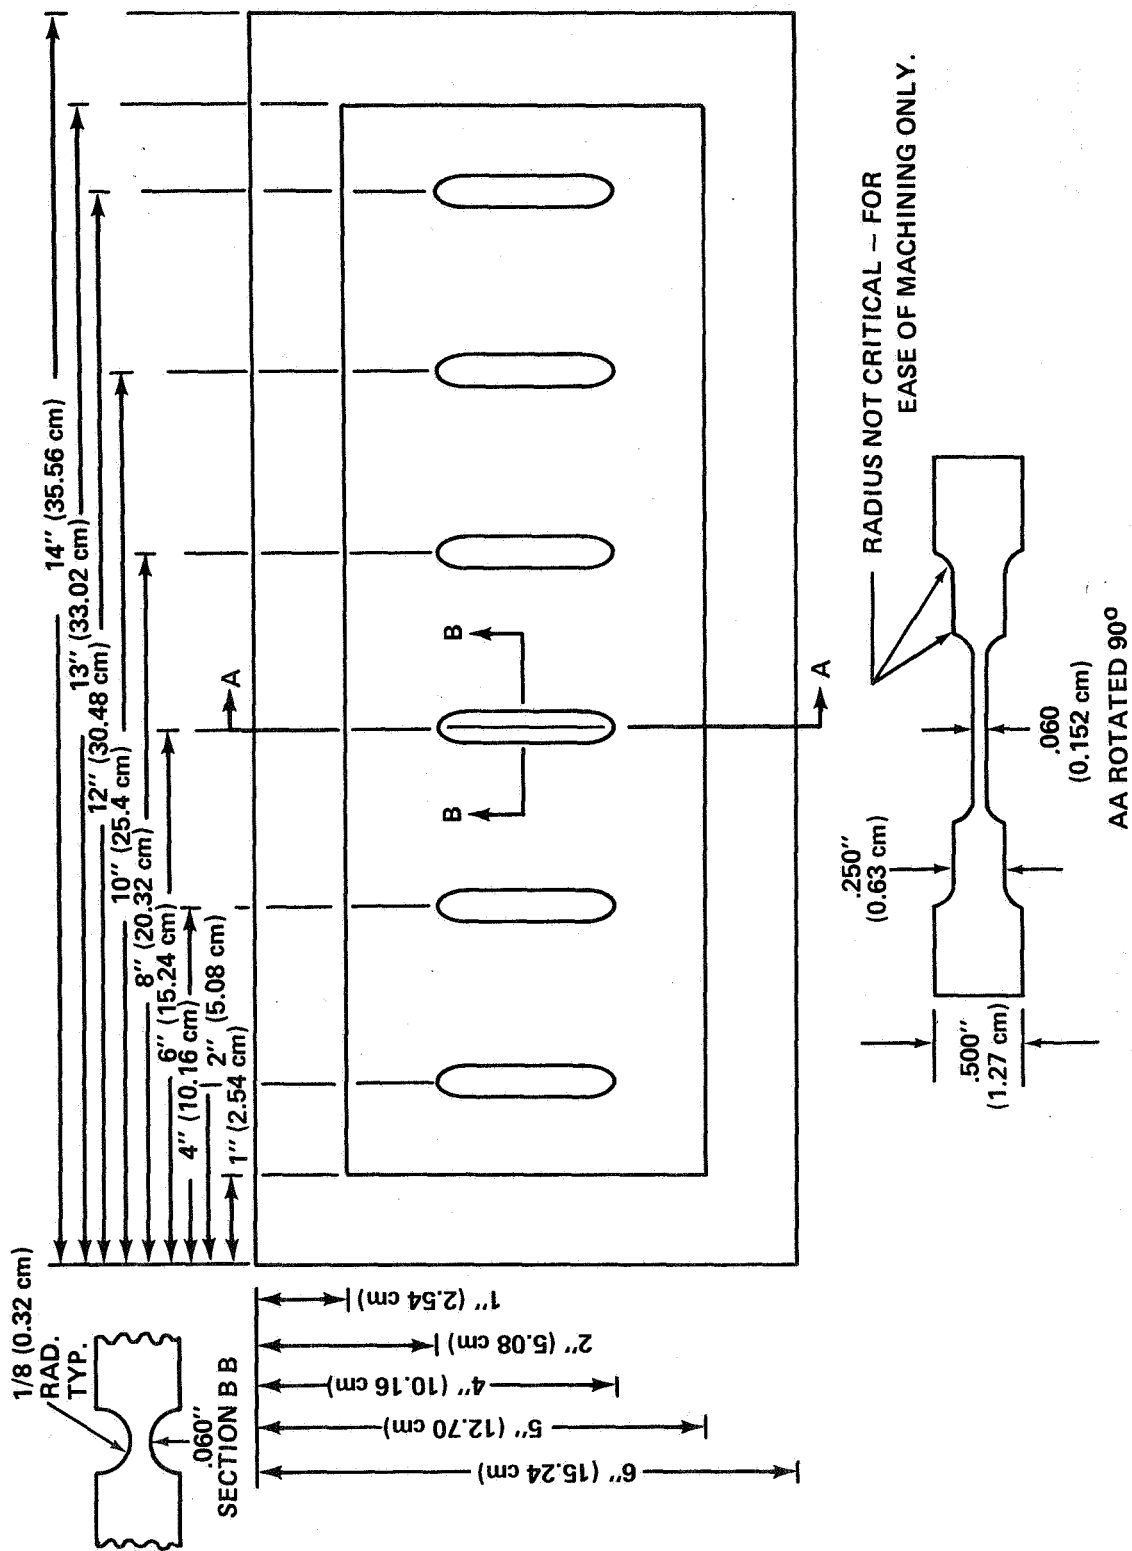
Scheme showing panel preparation and fatigue specimen removal areas for 1/2-inch (1.27 cm) thick plate Inconel 718.
